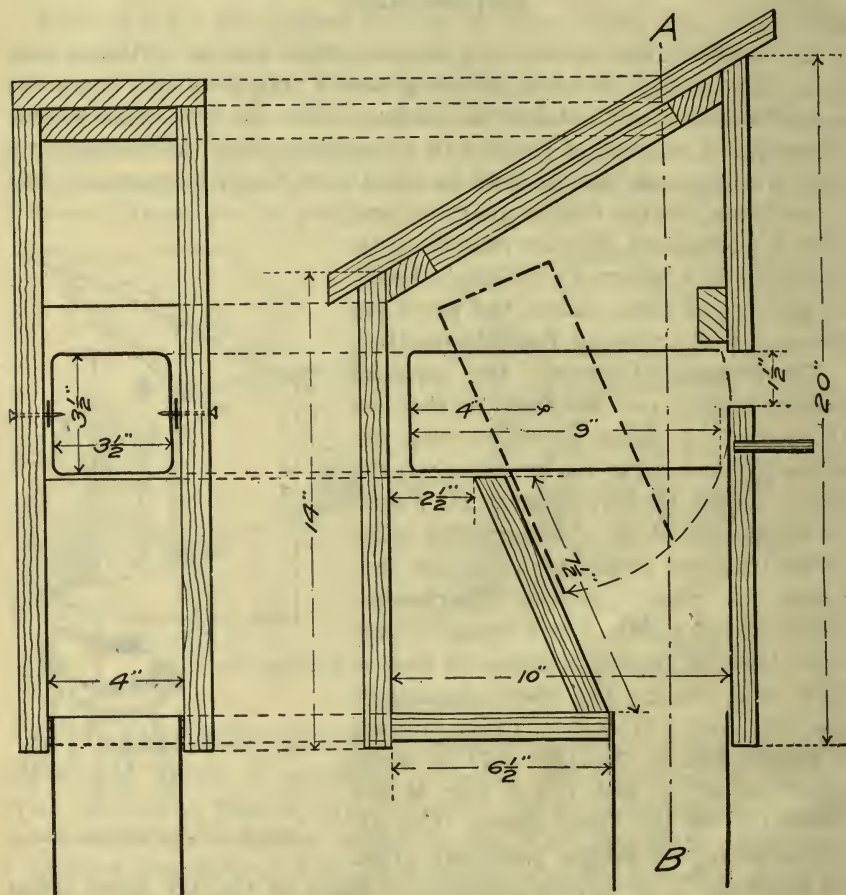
Sections showing construction of Tesch nest-box trap.
